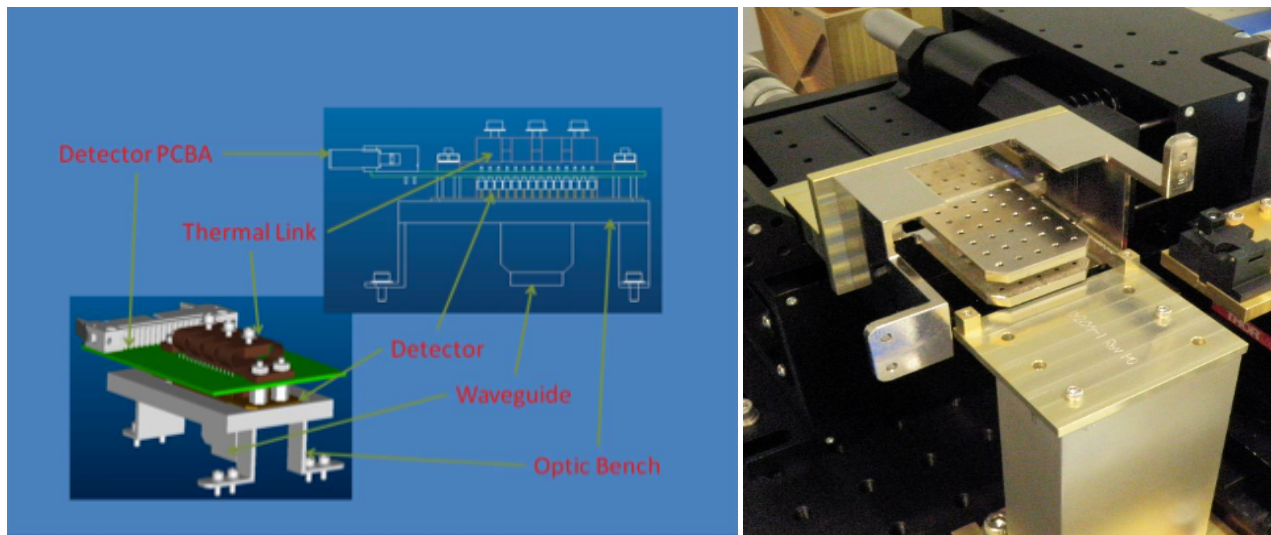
CAD of the third generation optical bench (left) during assembly (right)
